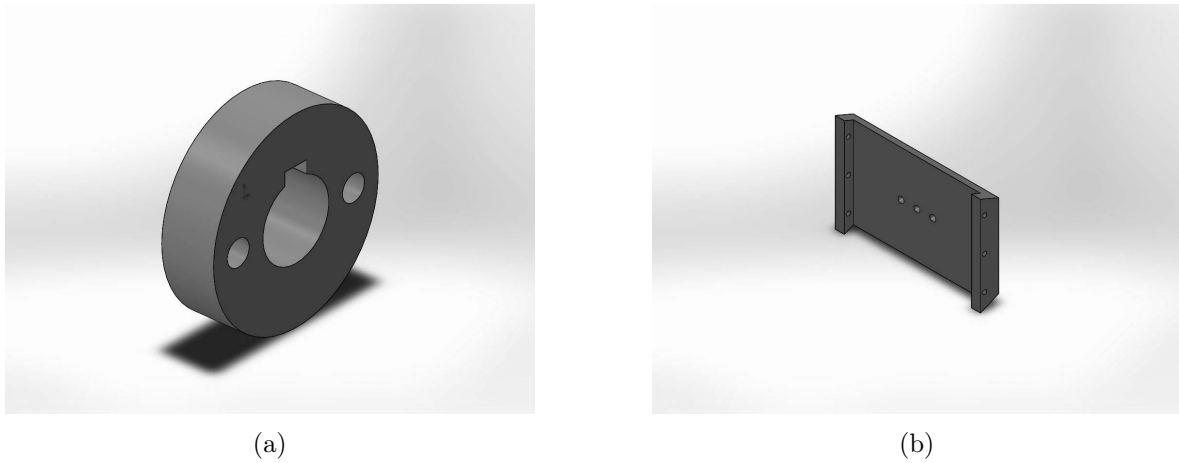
CAD model of the designed mechanical structure used to connect the gearhead shaft to the base of the Dynamixel servo, where a) is used to establish the connection between the shaft and b) and b) is used to hold the Dynamixel servo motors at joint 2.
